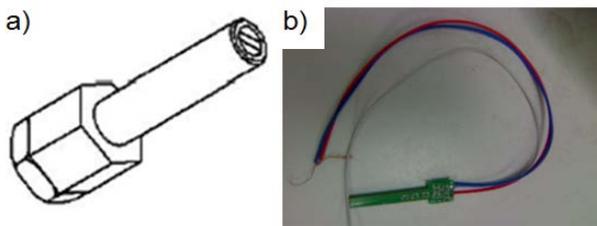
Designed sensor. a) appearance of the sensor, b) electronic chip inside the sensor
